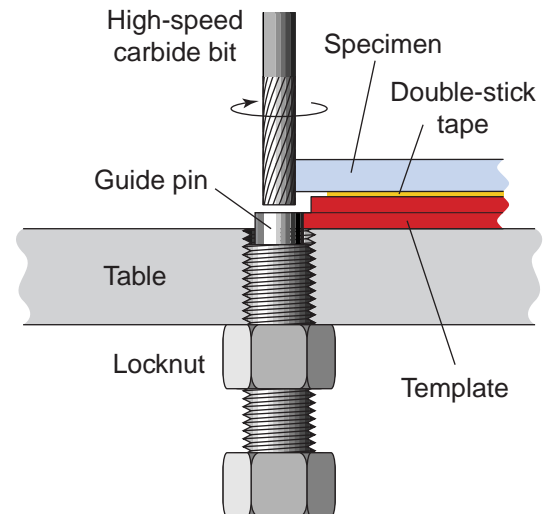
Use of a template, router, and guide pin to rout the edge of a specimen.
